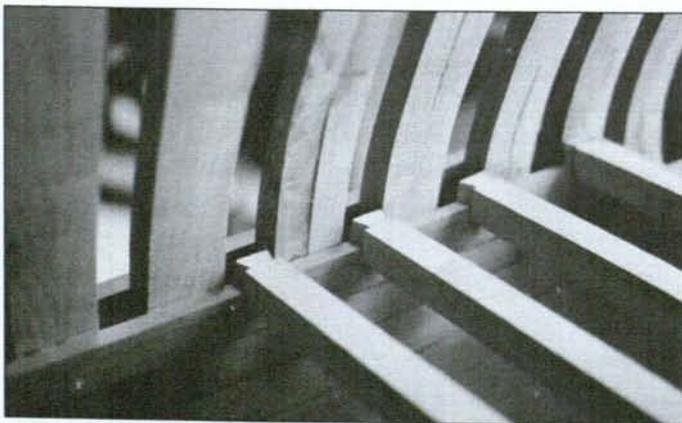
(left). Dovetailing of beams into the beam clamps.
